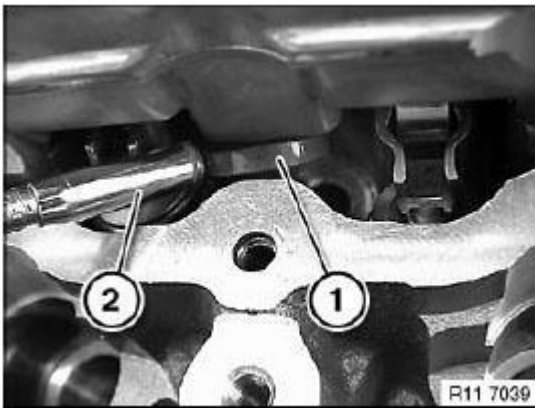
Removing Shims Of Cylinder Head Bolts Using Magnet
